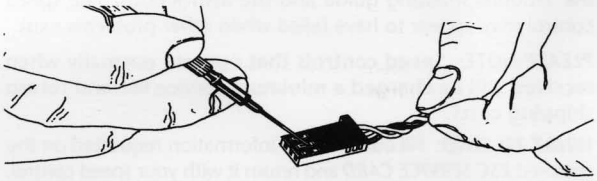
With the screwdriver, carefully lift up each of the metal locking tabs to the angle shown.
